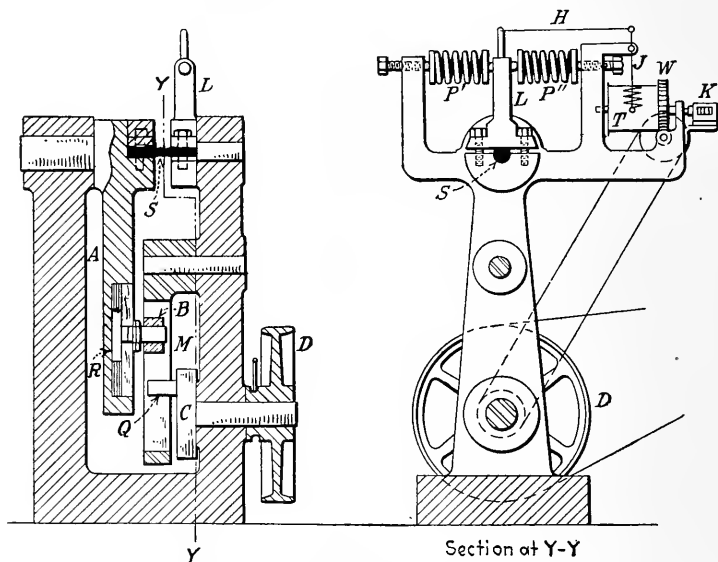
Diagram of repeated-torsion spring-type testing machine. (Olsen-Foster.)
